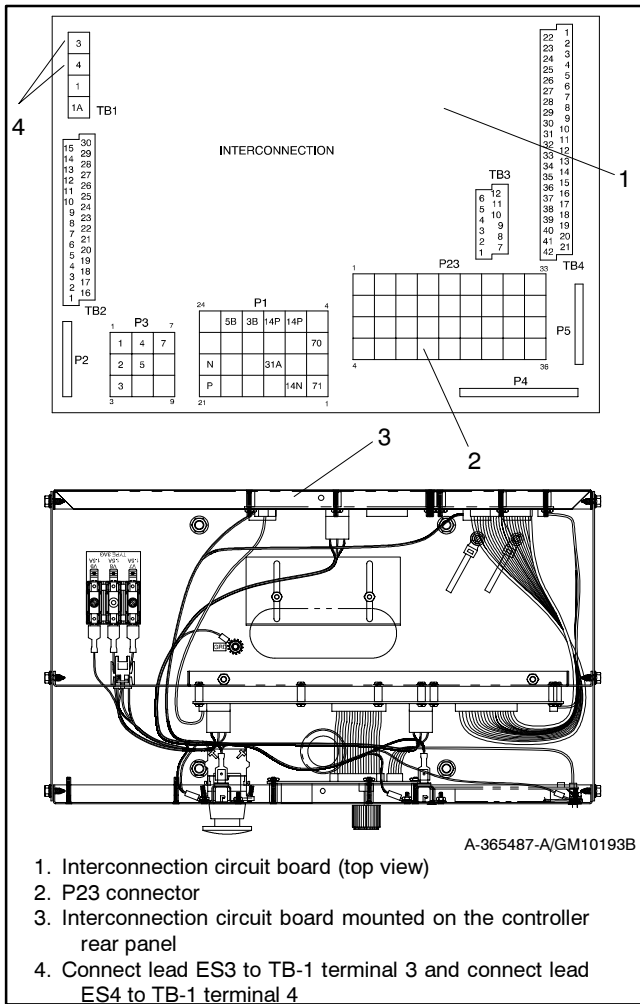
Attaching Wiring Connection Harness to Controller Circuit Board
